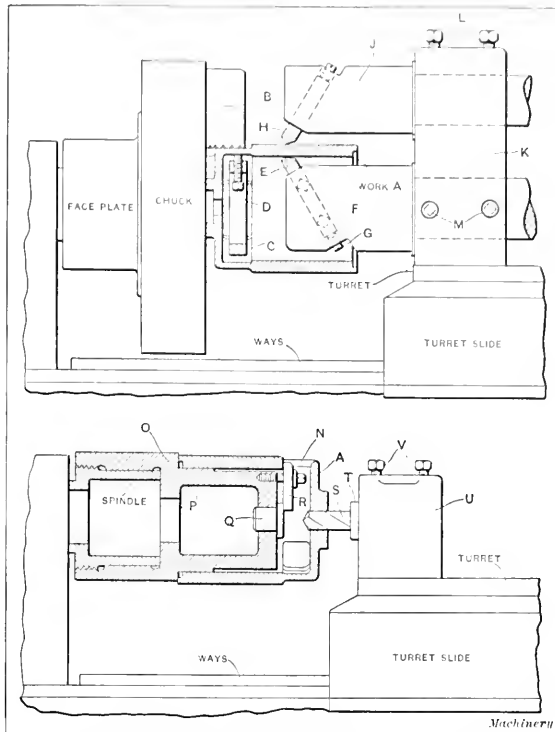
Steel Casting of Fragile Construction machined on Turntable Lathe
